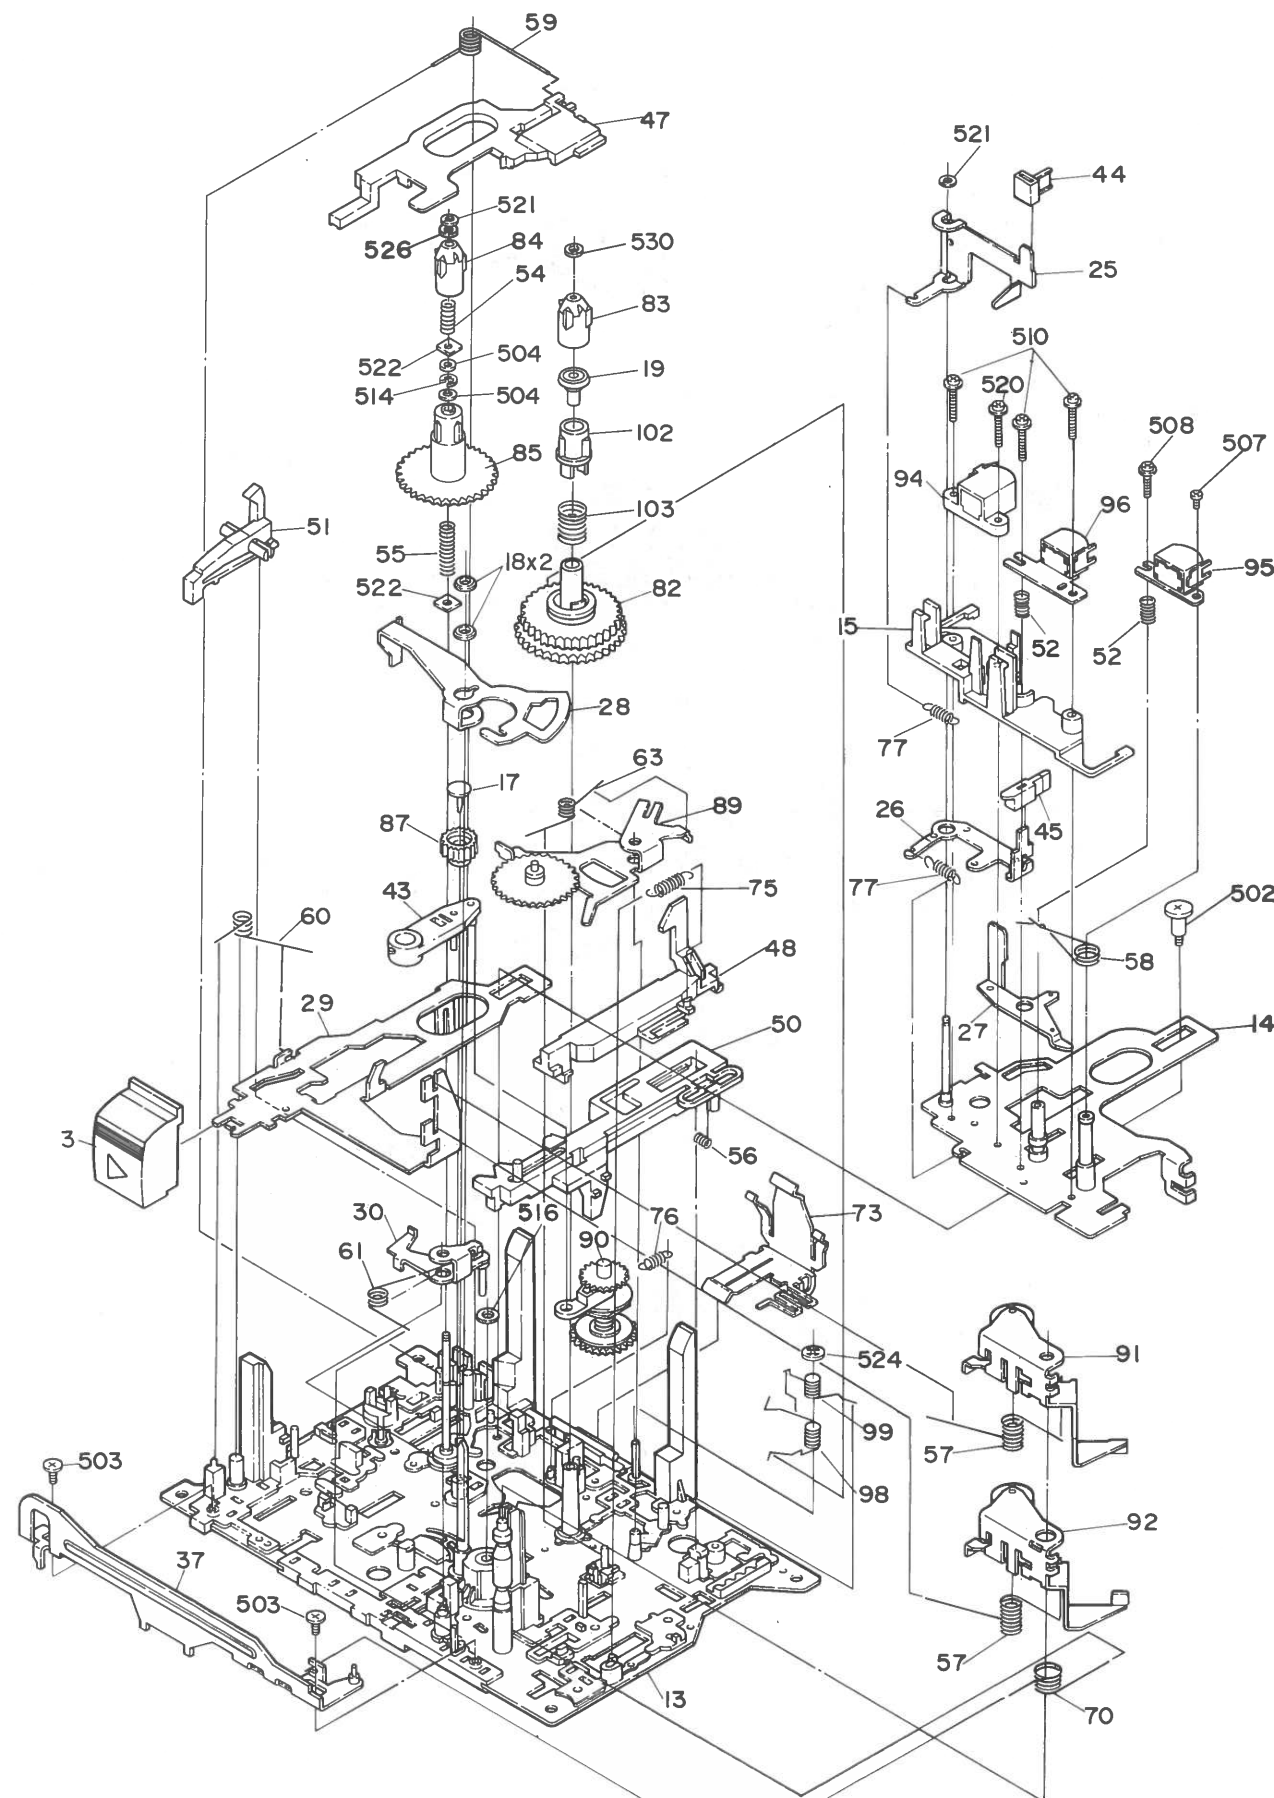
TAPE MECHANISM EXPLODED VIEW (1/2)
